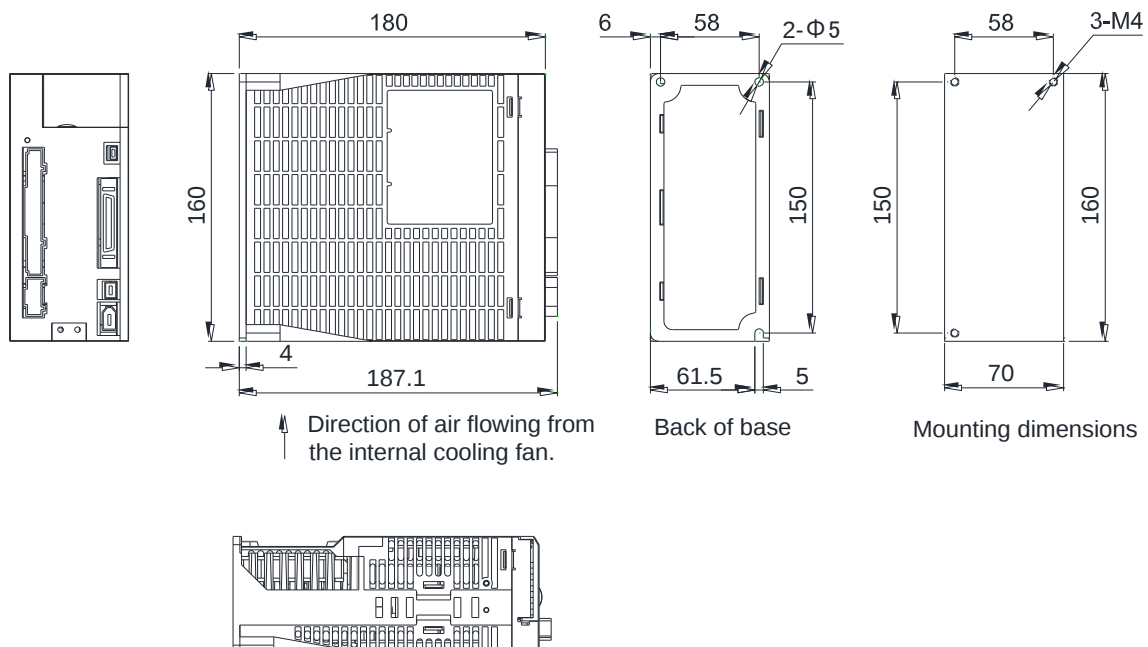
Outline dimensional drawing of WSDV-5R0 and WSDV-6R8
